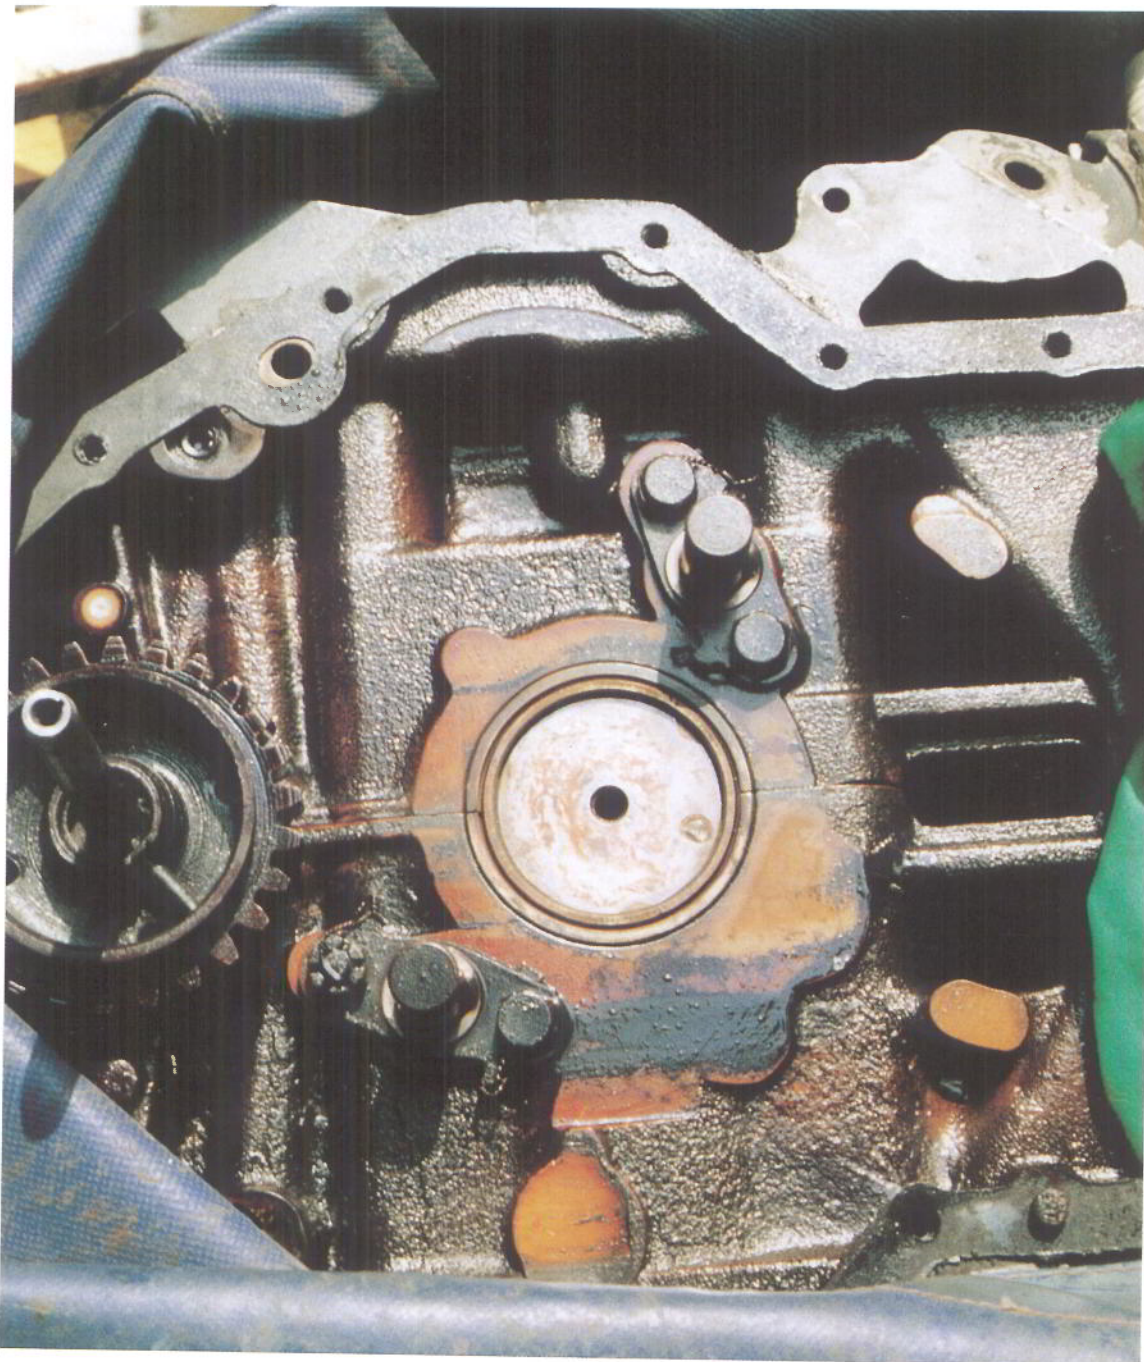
SHOWING FRACTURED LOCATING DOWEL
